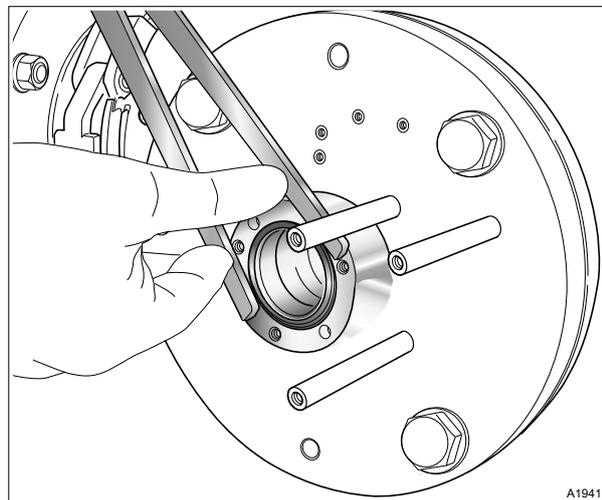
Tightening torque $90^\circ \pm 5^\circ$
